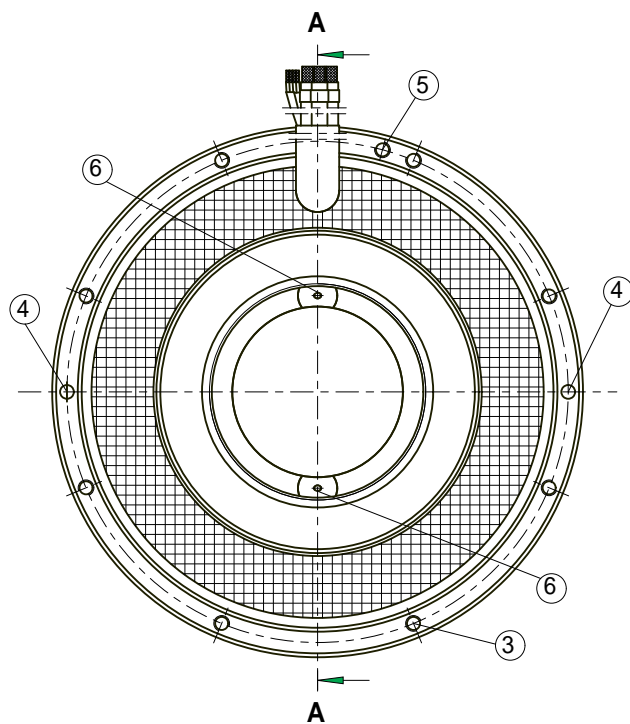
1MB 240 frameless spindle motor - dimensional data (part 1)
